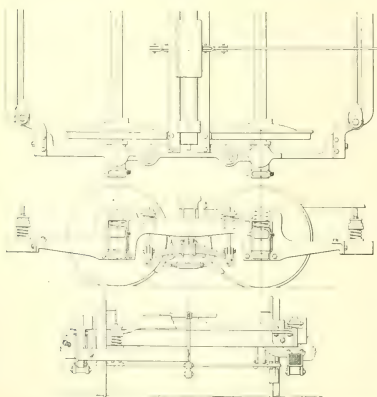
MOTOR TRUCK BY THE PECKHAM MANUFACTURING COMPANY
